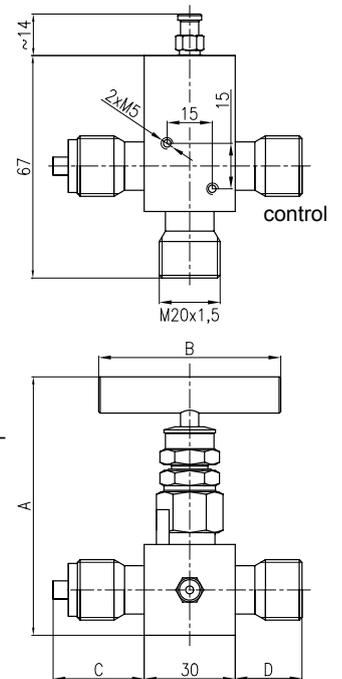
Manometric with internal threads (967 61..), dimensional drawing, scheme, application
